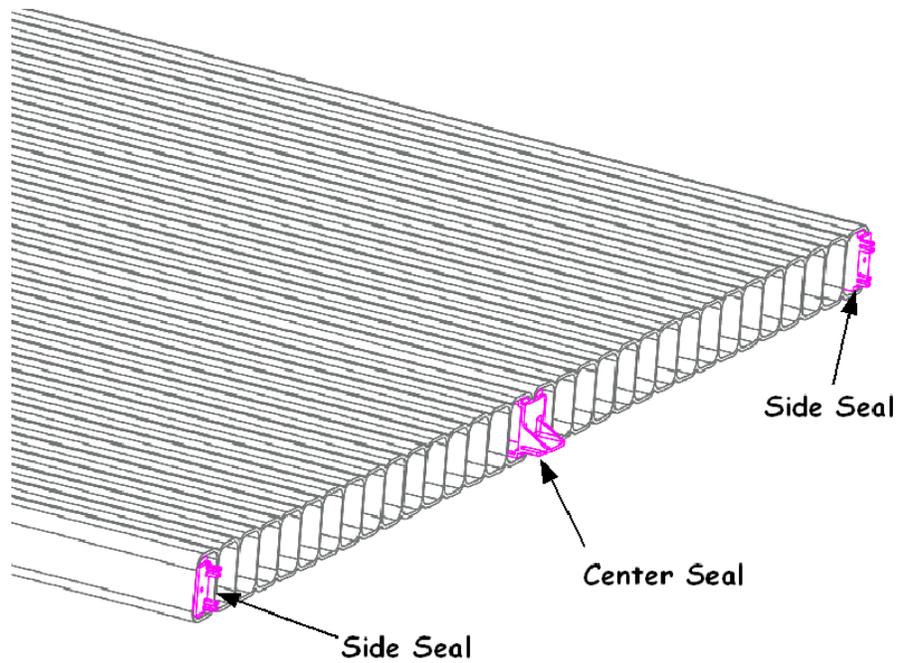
Assembly of side and center seals in the extrusion.
